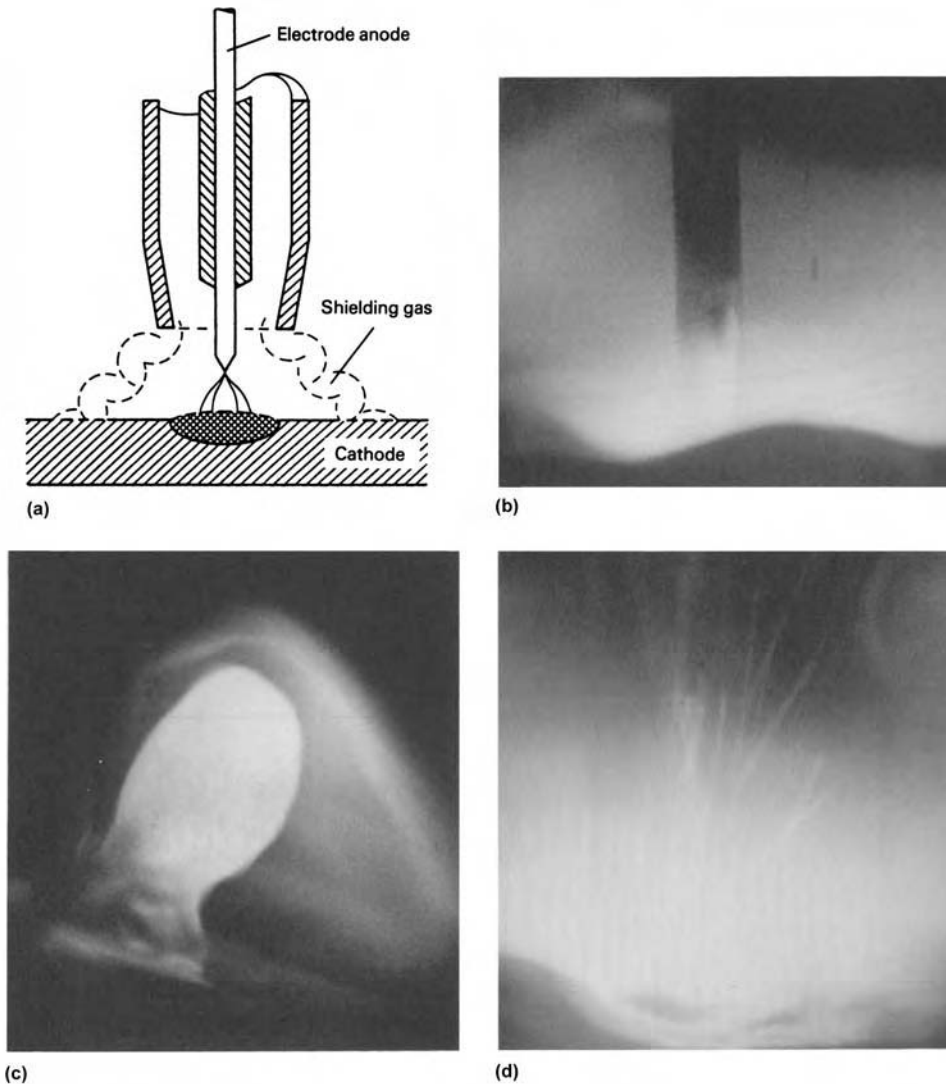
Short-circuiting transfer mode in gas metal arc welding of steel. (a) Schematic showing transfer of electrode material by surface tension of weld pool onto cathode base metal. (b) High-speed photograph of material transfer when arc length is very short. (c) High-speed photograph of cyclic shorting of arc by the electrode during metal transfer to weld pool. (d) High-speed photograph of violent arc reignition with associated spatter
